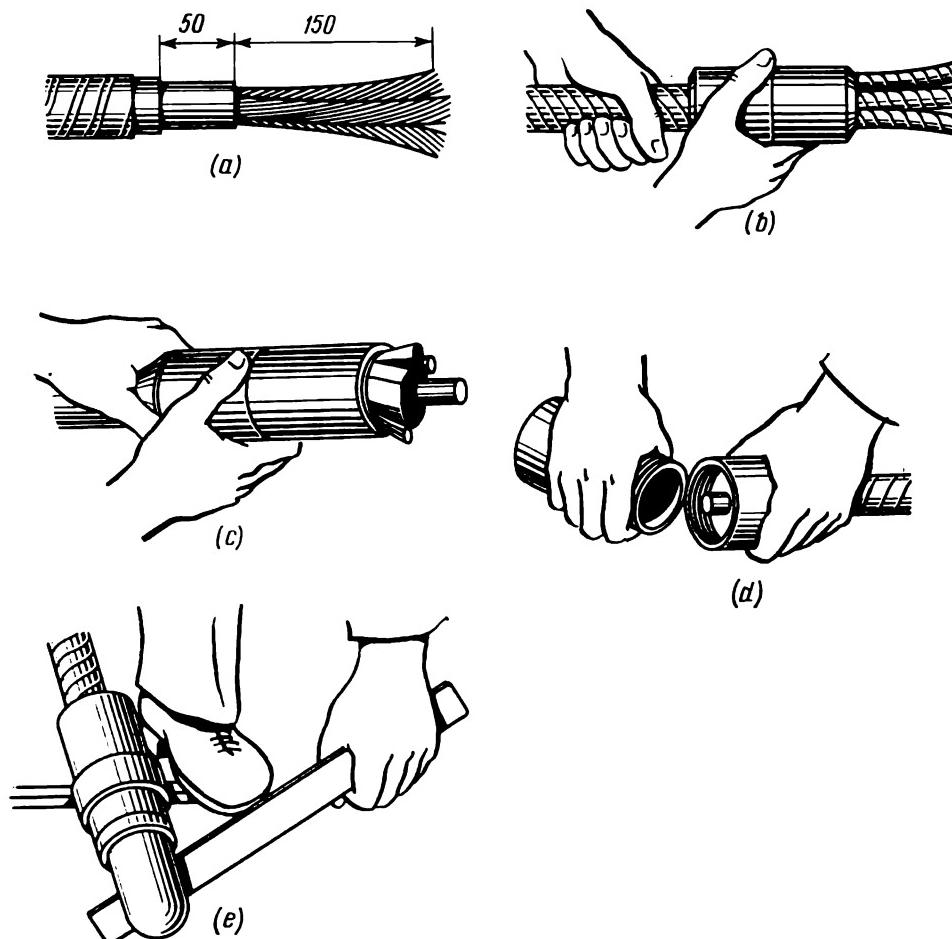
Fitting a clamp on the end of a cable being reeled off (a, b, c, 'd, e—successive stages)
